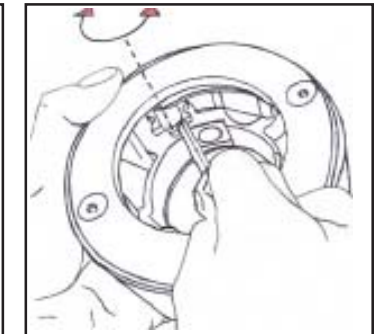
Make necessary adjustments by rotating 'open' gear. To give correct setting. Refit interlock, and re-check for correct operation.
